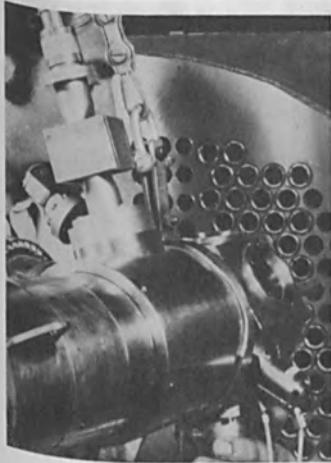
E.B. «Pistolet» for tube-to-tubesheet Welding. Fig. 2 : «Pistolet» use on drilling machine
